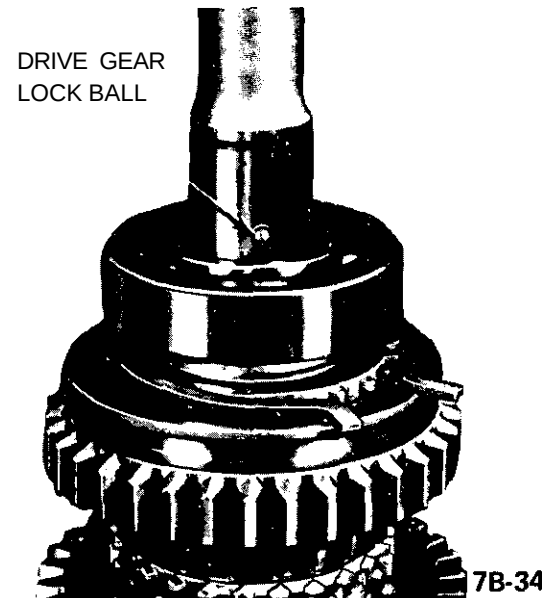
B-34 Speedometer Drive Gear Lock Ball on Mainshaft
